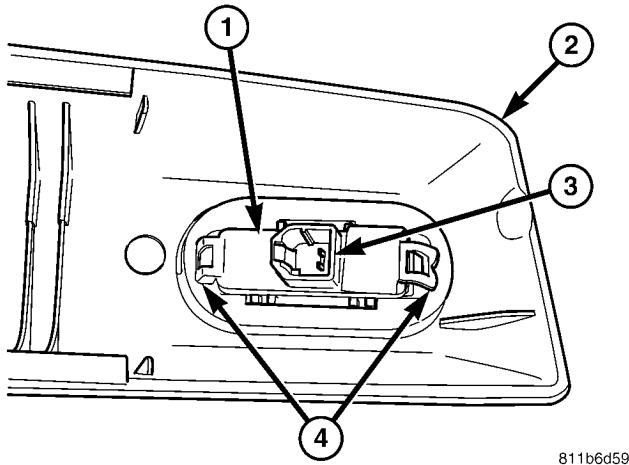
Passenger Airbag On/Off Indicator Remove/Install
